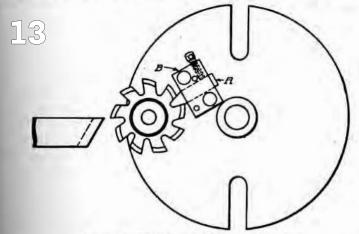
Set-Up for Backing Off Cutter on Faceplate
